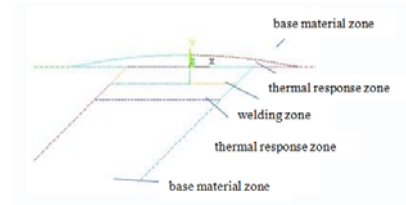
FIGURE VI. MATERIAL AROUND THE WELD JOINT
